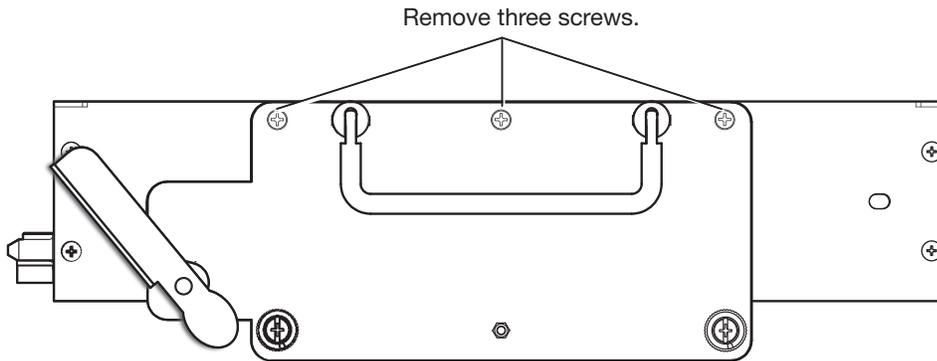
Removing the Plate from the Failed Redundant Power Supply Front Panel
